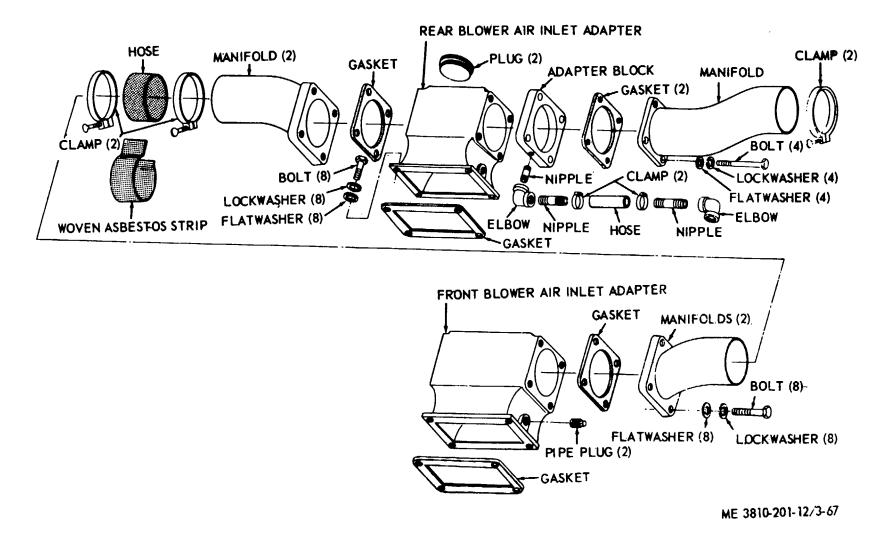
Blower Adapters, removal and installation (Engine Model 687C-18-ES).
